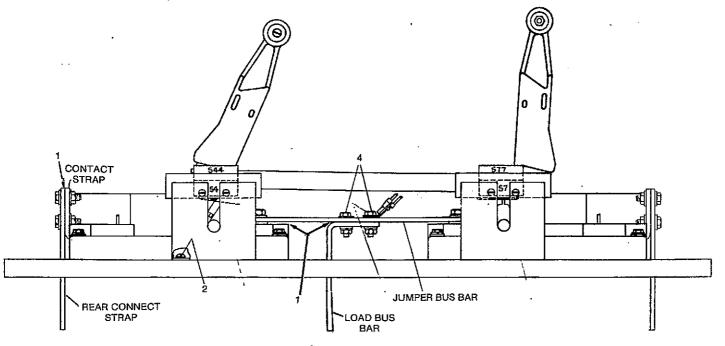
REAR CONNECT TRANSFER SWITCH ASSEMBLY
